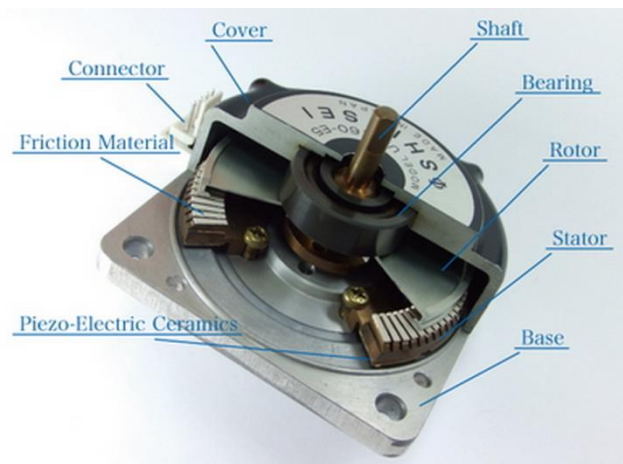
Internal components of Shinsei Motor USR60 (refer to www.shinsei-motor.com)
